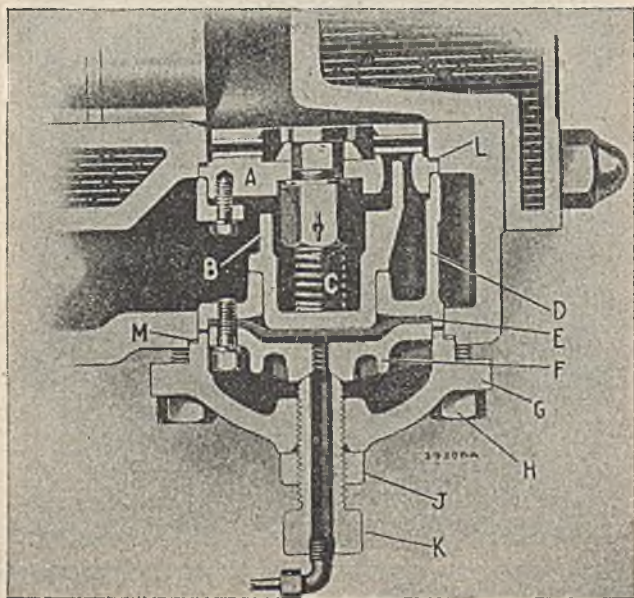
Cross section of compressor cylinder showing the arrangement of channel valves and free air unloaders.
